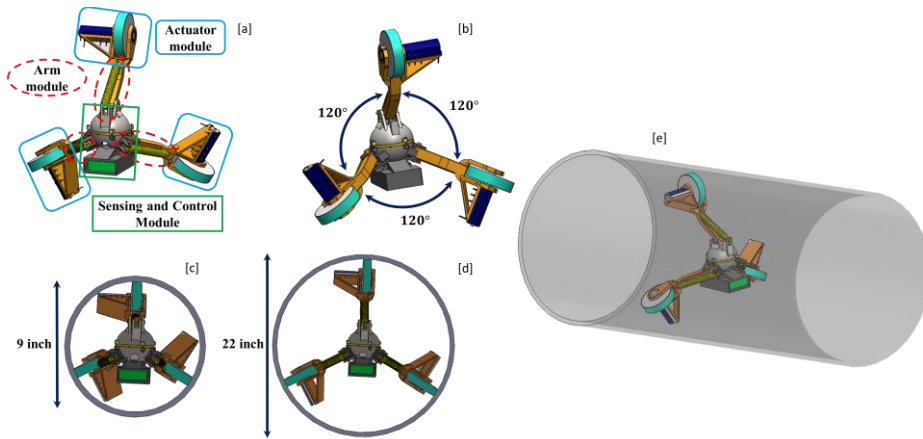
Overall views of the robot. [a] Front view. [b] Rear view. [c] Minimum robot diameter. [d] Maximum robot diameter. [e] Robot in the pipe.
